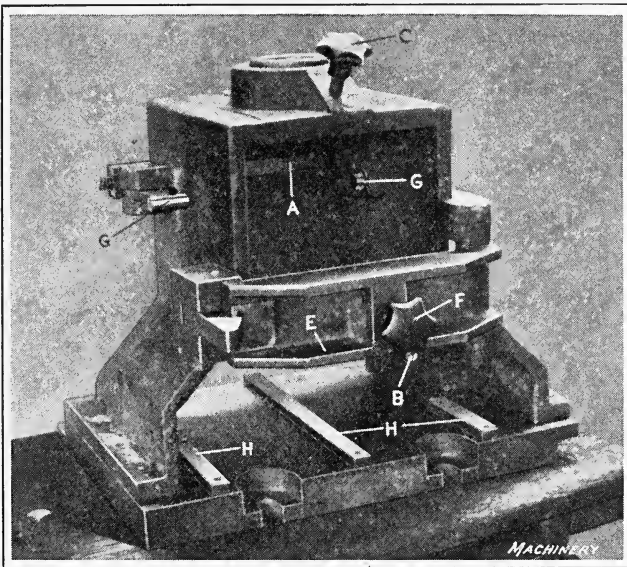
Front View of Jig for drilling Main Bearing Hole in Small End
